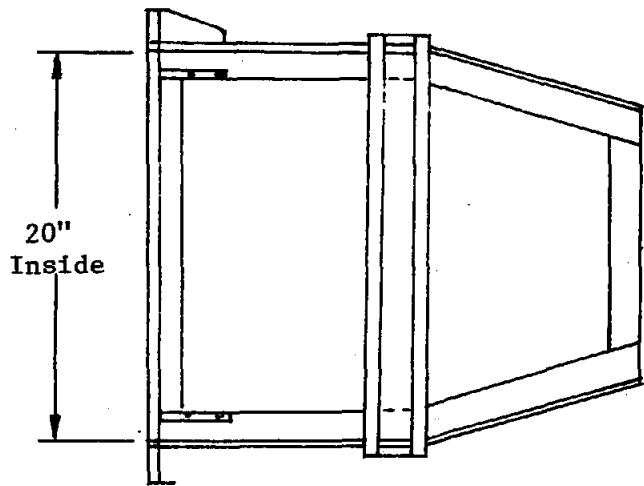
Dust Deposition Wind Tunnel Exit Section.
